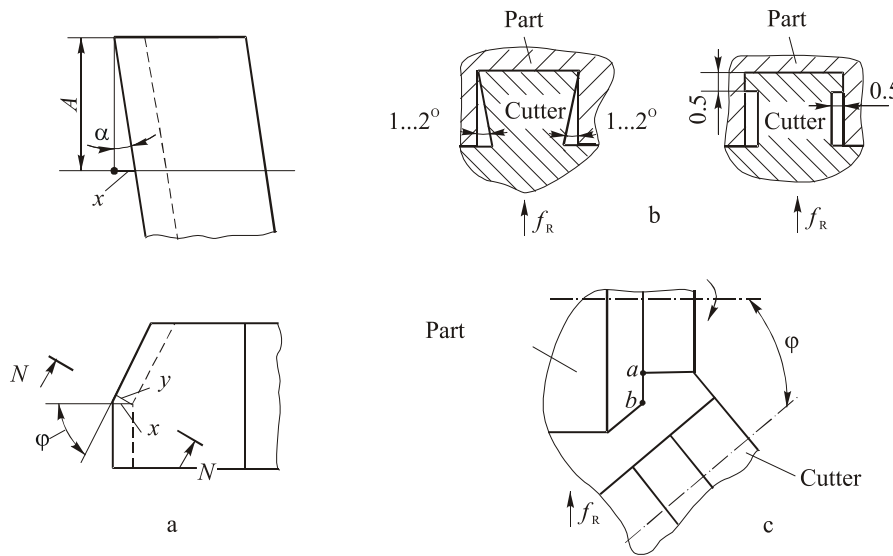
Elements of the form cutters: (a) clearance angles on inclined cutting edges; (b) undercut on the cutting edges perpendicular to the workpiece axis; (c) cutter with inclined profile
